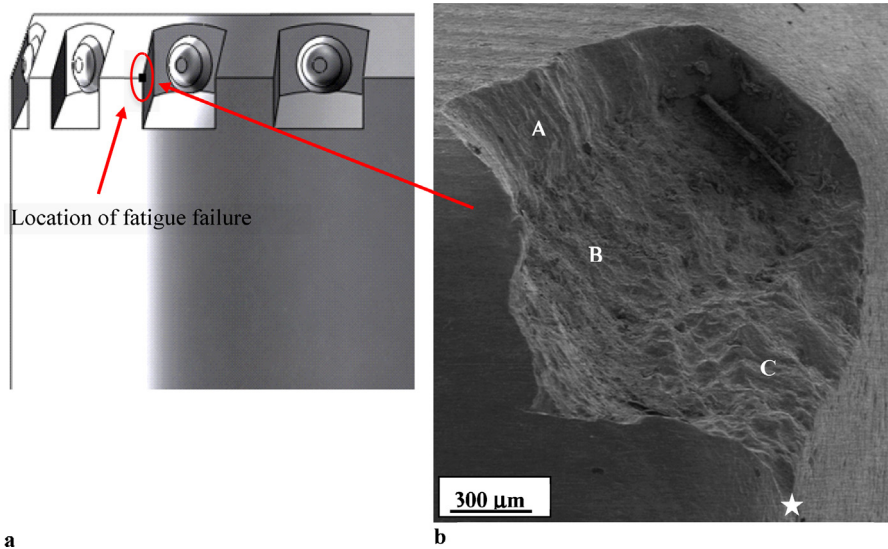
(a) The location where mandrel typically fails. Mandrel fails by cracking or chipping which produces unacceptable defects on the formed parts. Cracking and chipping typically takes place on the corners of the slots either at the head of the spline/slot or at the base. (b) the scanning electron microscopy image taken of the fracture surface of the failed spline which consists of three distinct zones of (A) lamellar, (B) transition and (C) wavy.
